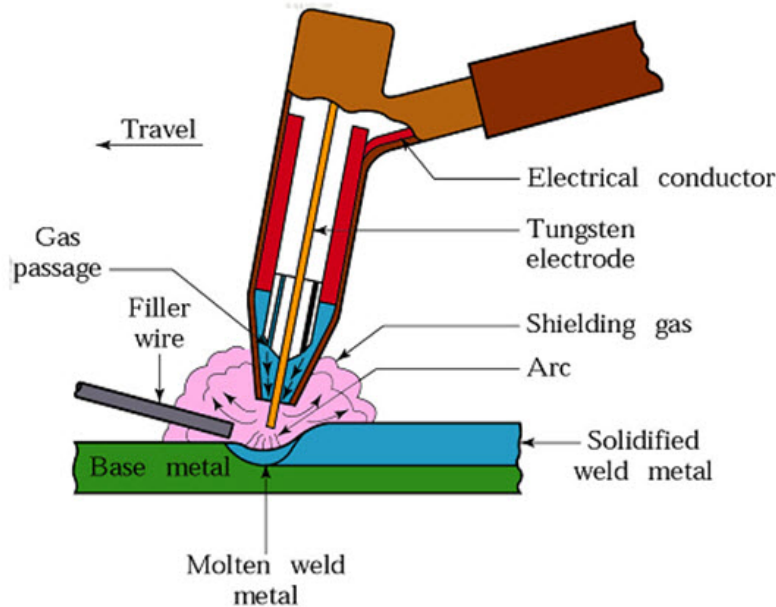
The gas tungsten-arc welding process, formerly known as TIG (for tungsten inert gas) welding.
